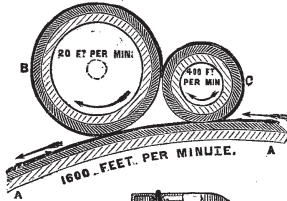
ROLLER & CLEARER CARDING MACHINE 1866.
